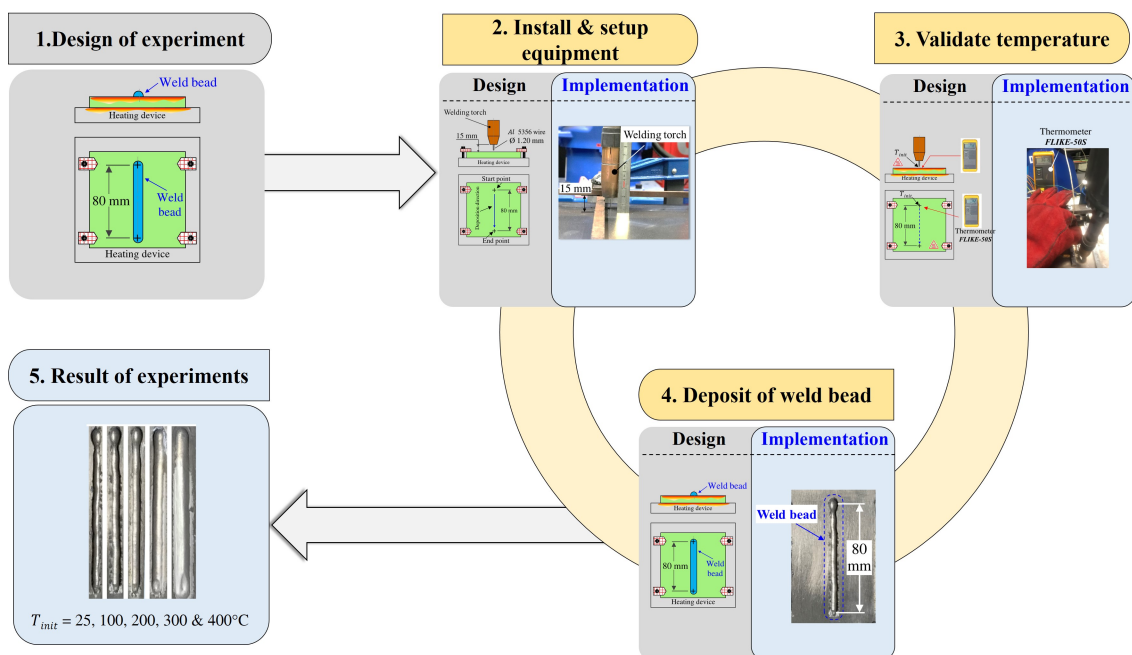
Design of experiment of single weld bead on a flat substrate
